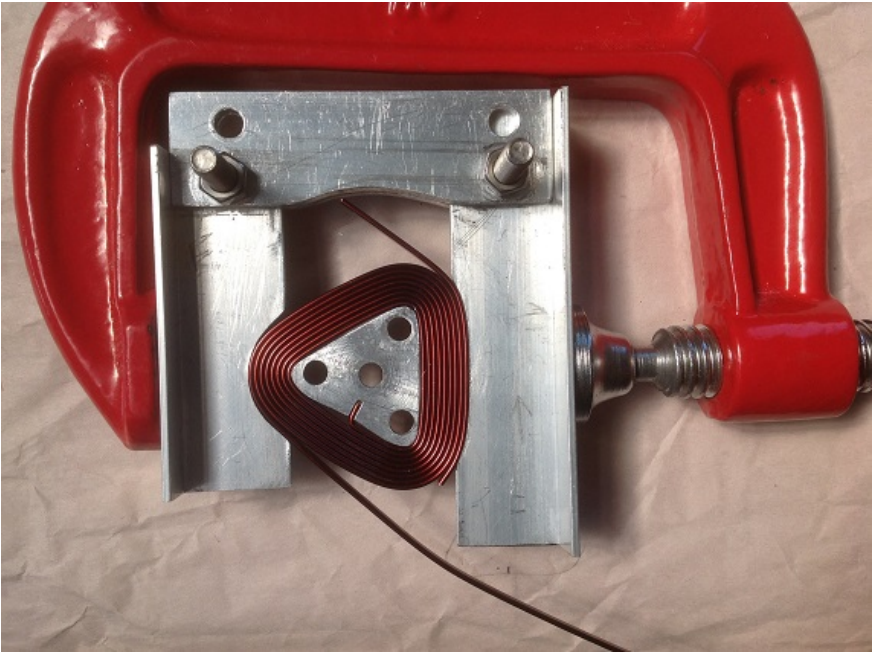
A single layer coil is removed from the winding machine. Once the centre former is knocked out the coil can be zip-tied allowing for clamp removal.
